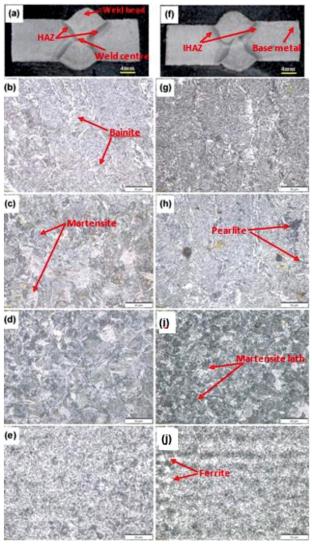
Images of AW and FW joints: a) Macrograph of AW, b) weld bead of AW, c) weld center of AW, d) HAZ of AW, e) IHAZ of AW, f) macrograph of FW, g) weld bead of FW, h) weld center of FW, i) HAZ of FW, j) IHAZ of FW
